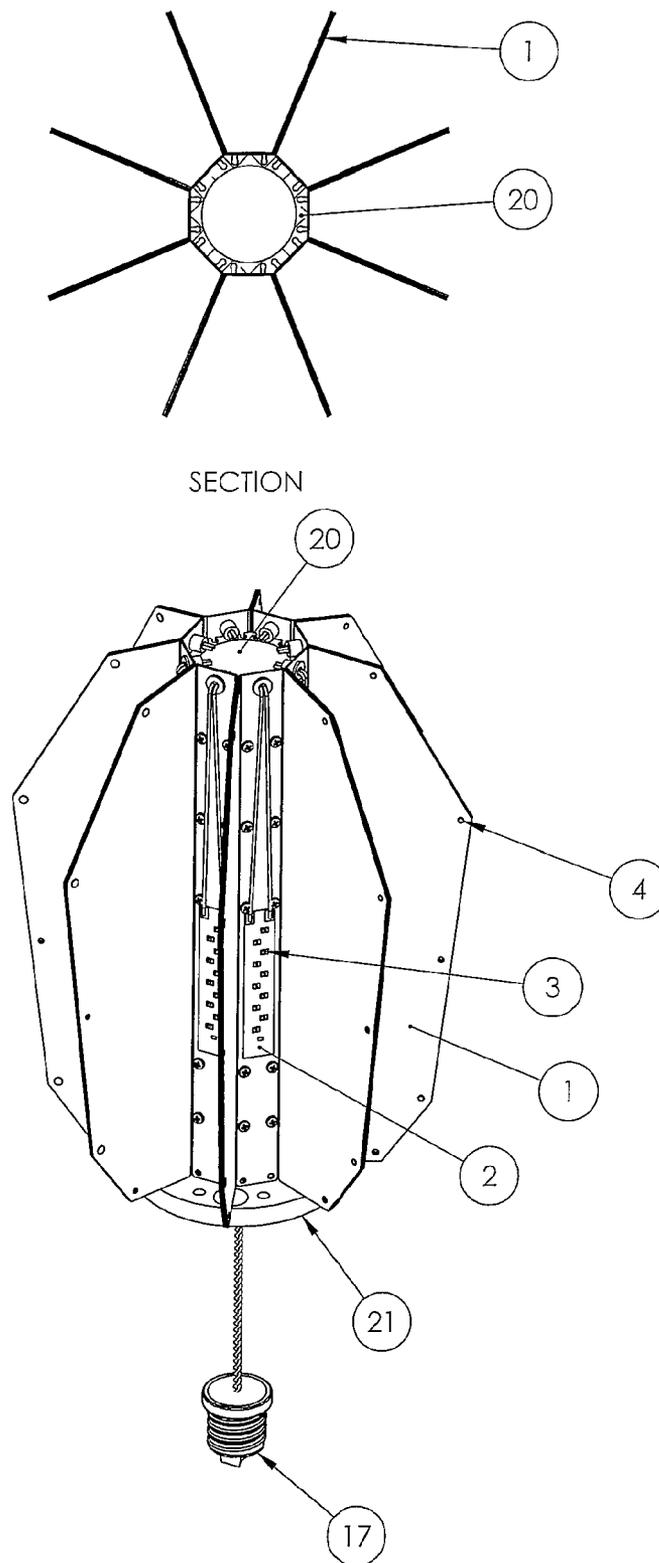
8-Sided LED Fixture Assembly w/ Extruded Heat Sink
